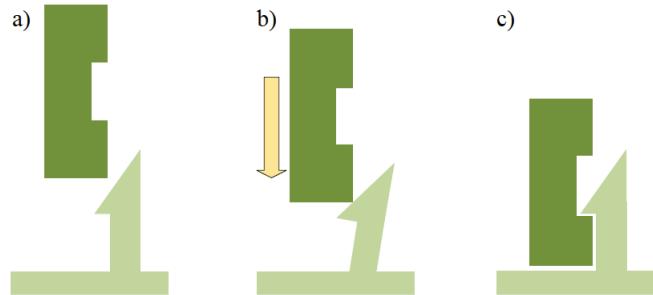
Snap-Fit Joint: a) separated, b) joining process, c) assembled
